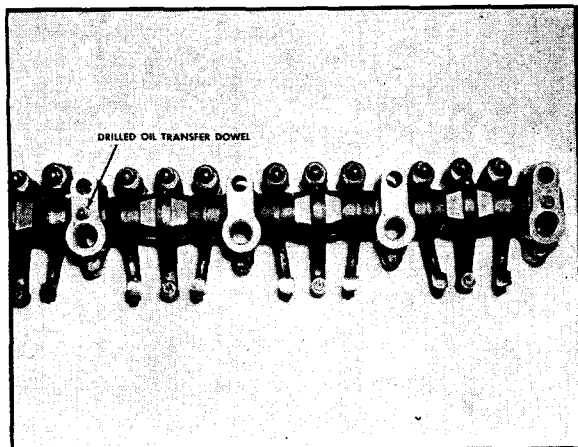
Rocker shaft bearing oil transfer dowel
